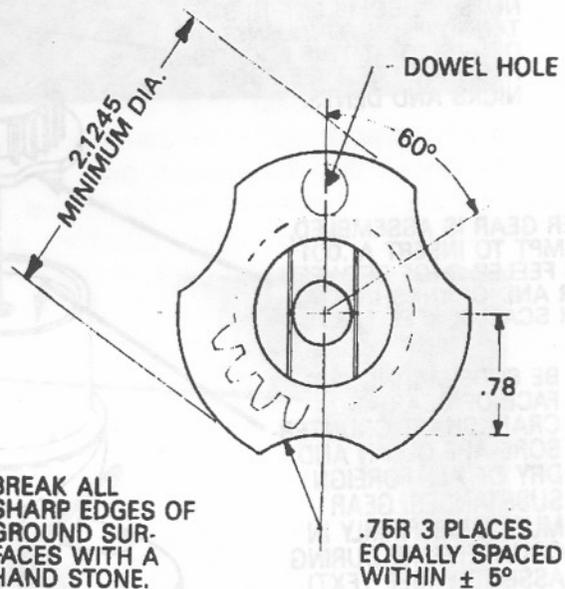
Details for Modification of Crankshaft Gear to Provide Means for Inspection
